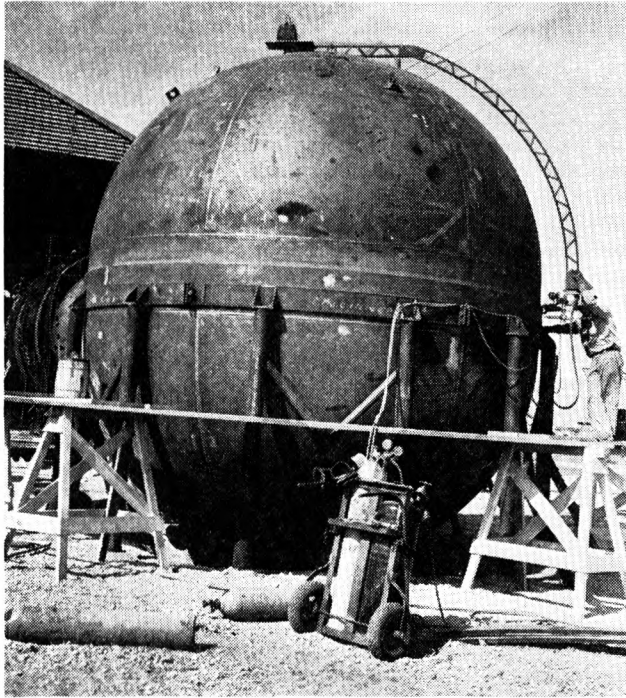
TWO HEMISPHERICAL BULKHEADS WELDED TOGETHER FOR PRESSURE TEST AND BEING SEPARATED BY FLAME-CUTTING
